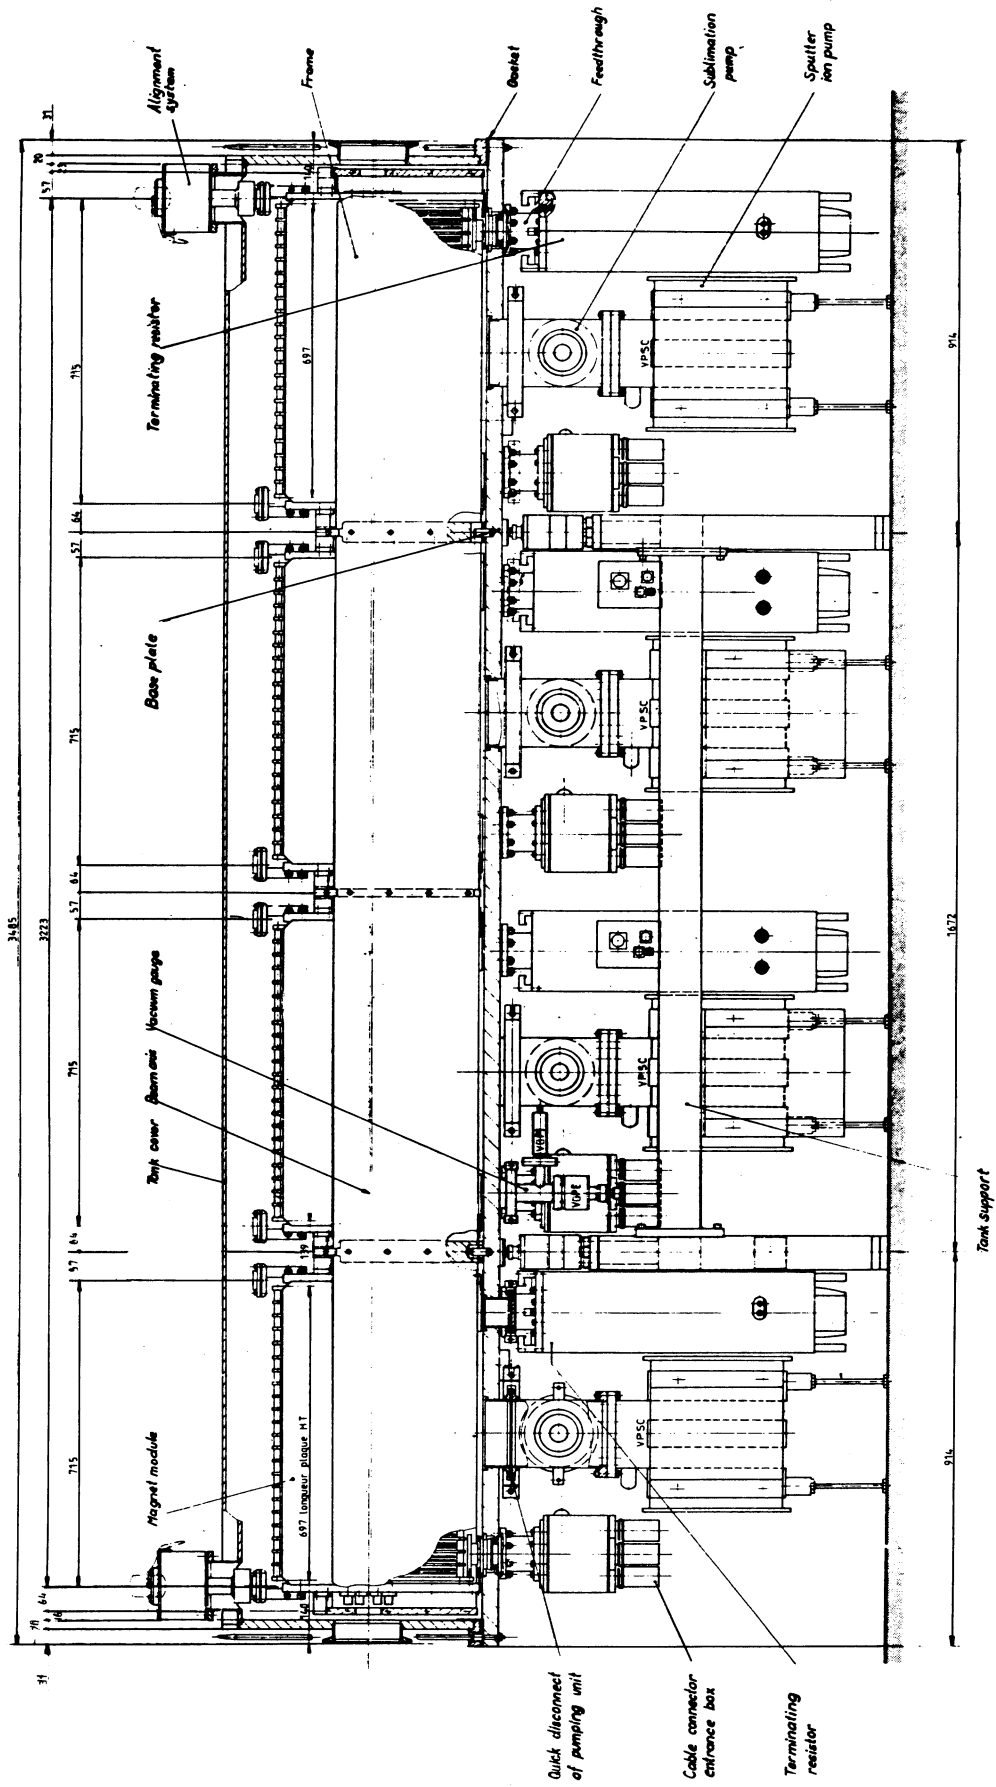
Longitudinal section through the vacuum tank of the proton inflector, showing 4 modules in their frame, terminating resistors and vacuum pumps.
